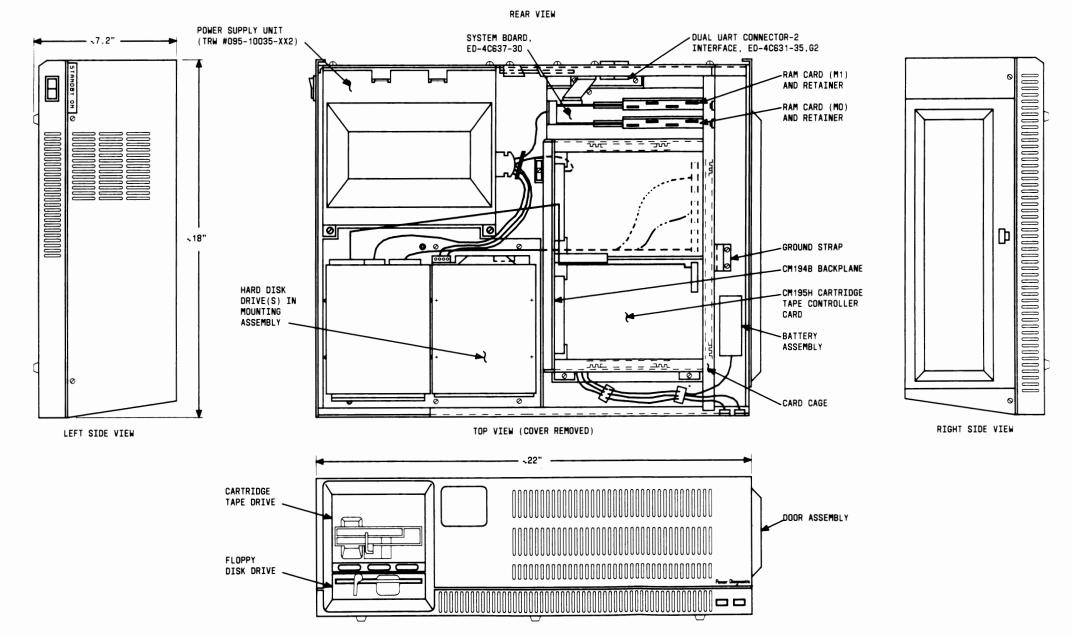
International 3B2/400 Computer Cabinet Assembly Drawing (ED-4C638-30)
